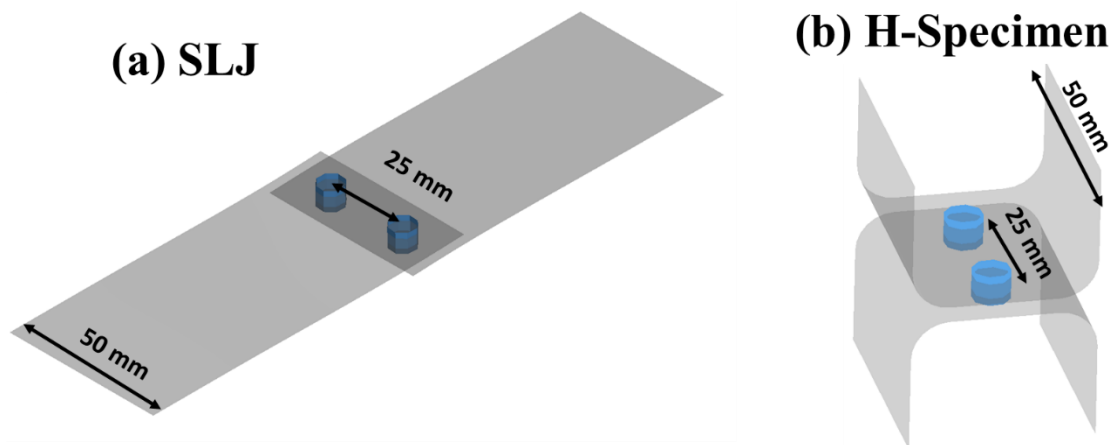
The SLJ (a) and H-specimen (b) joined using two rivets with a rivet spacing of 25 mm
